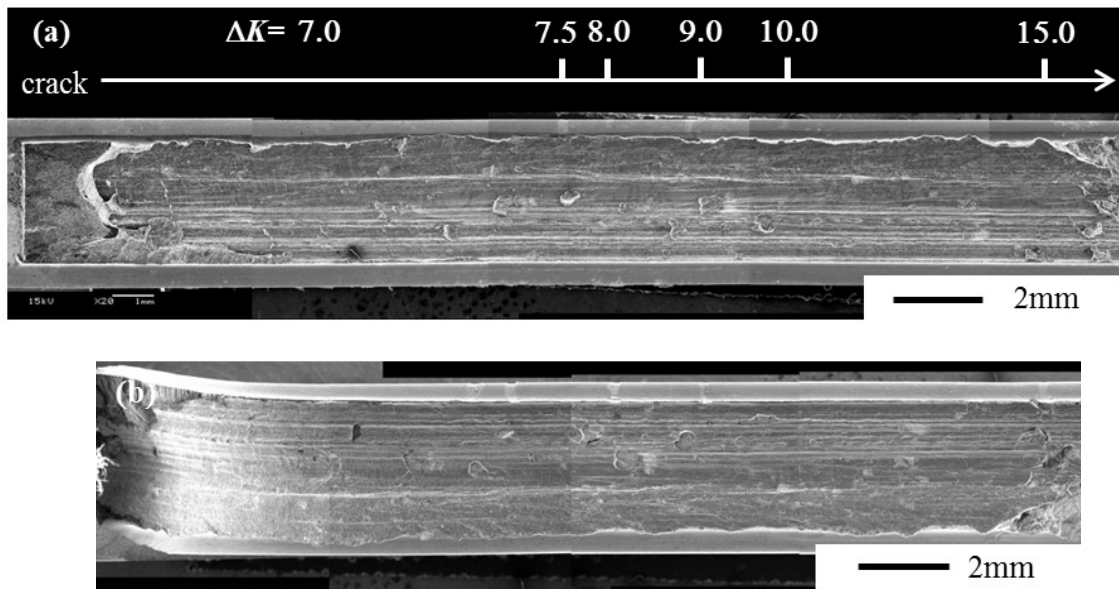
Fracture surface of PS<sub>24</sub>A after FCP test.
